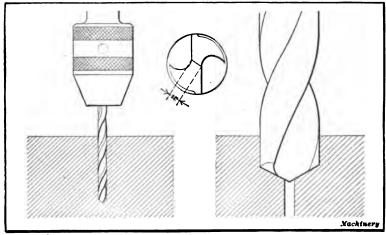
Pressure for Feeding Large Drill can be reduced by D. illing Small "Leso Hole"
